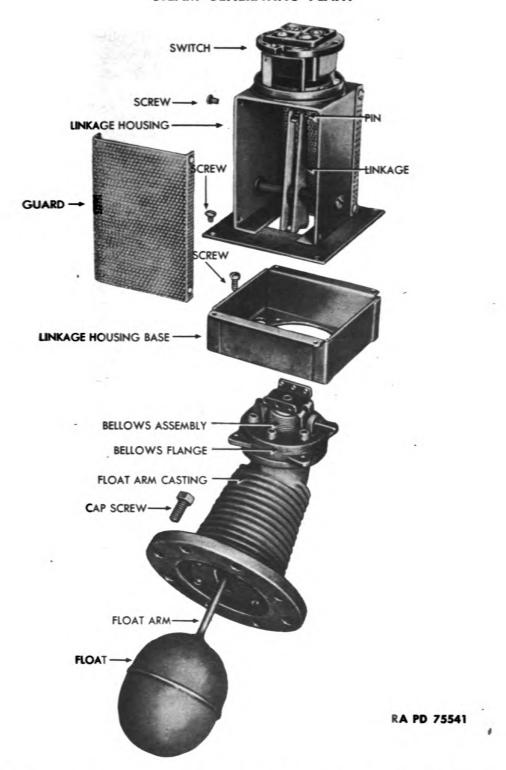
Steam Generating Plant Low Water Control — Partially Exploded View
